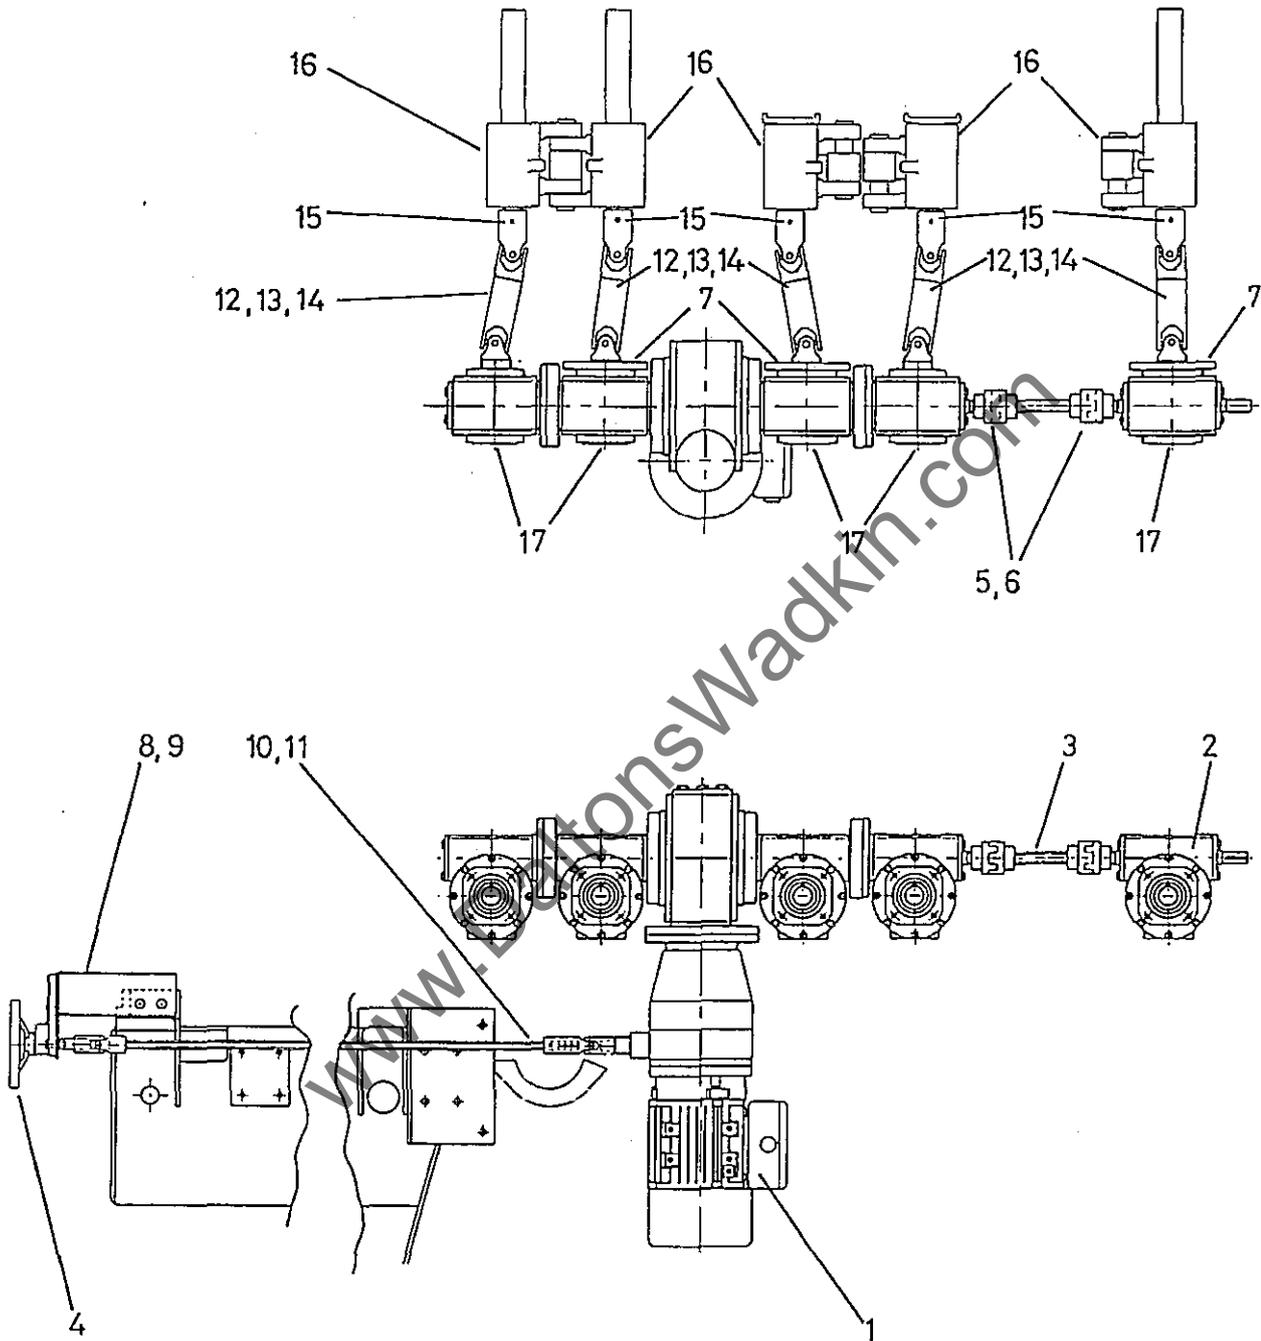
GEARBOXES AND DRIVE SHAFTS (VARIABLE SPEED)
